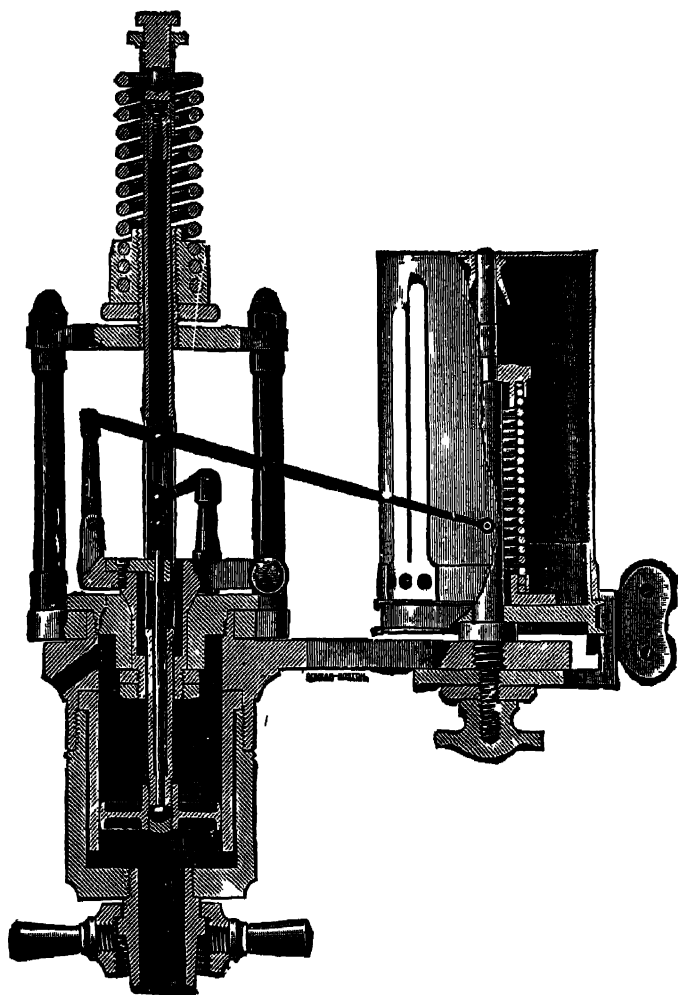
A CROSBY EXTERNAL SPRING INDICATOR
